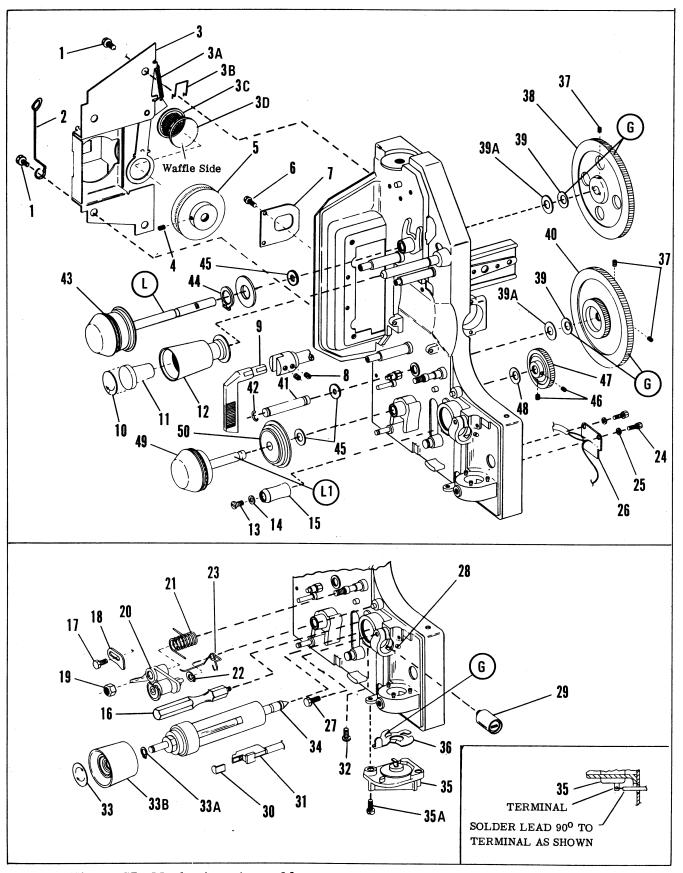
Mechanism Assembly — View I (Heat Shutter, Impedance Roller Lower Sprocket, Photocell and Sound Drum Parts)
